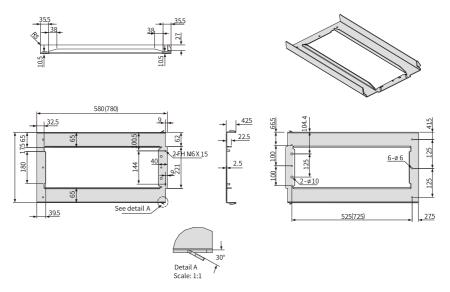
Dimensions of bottom mounting bracket for T12 models
